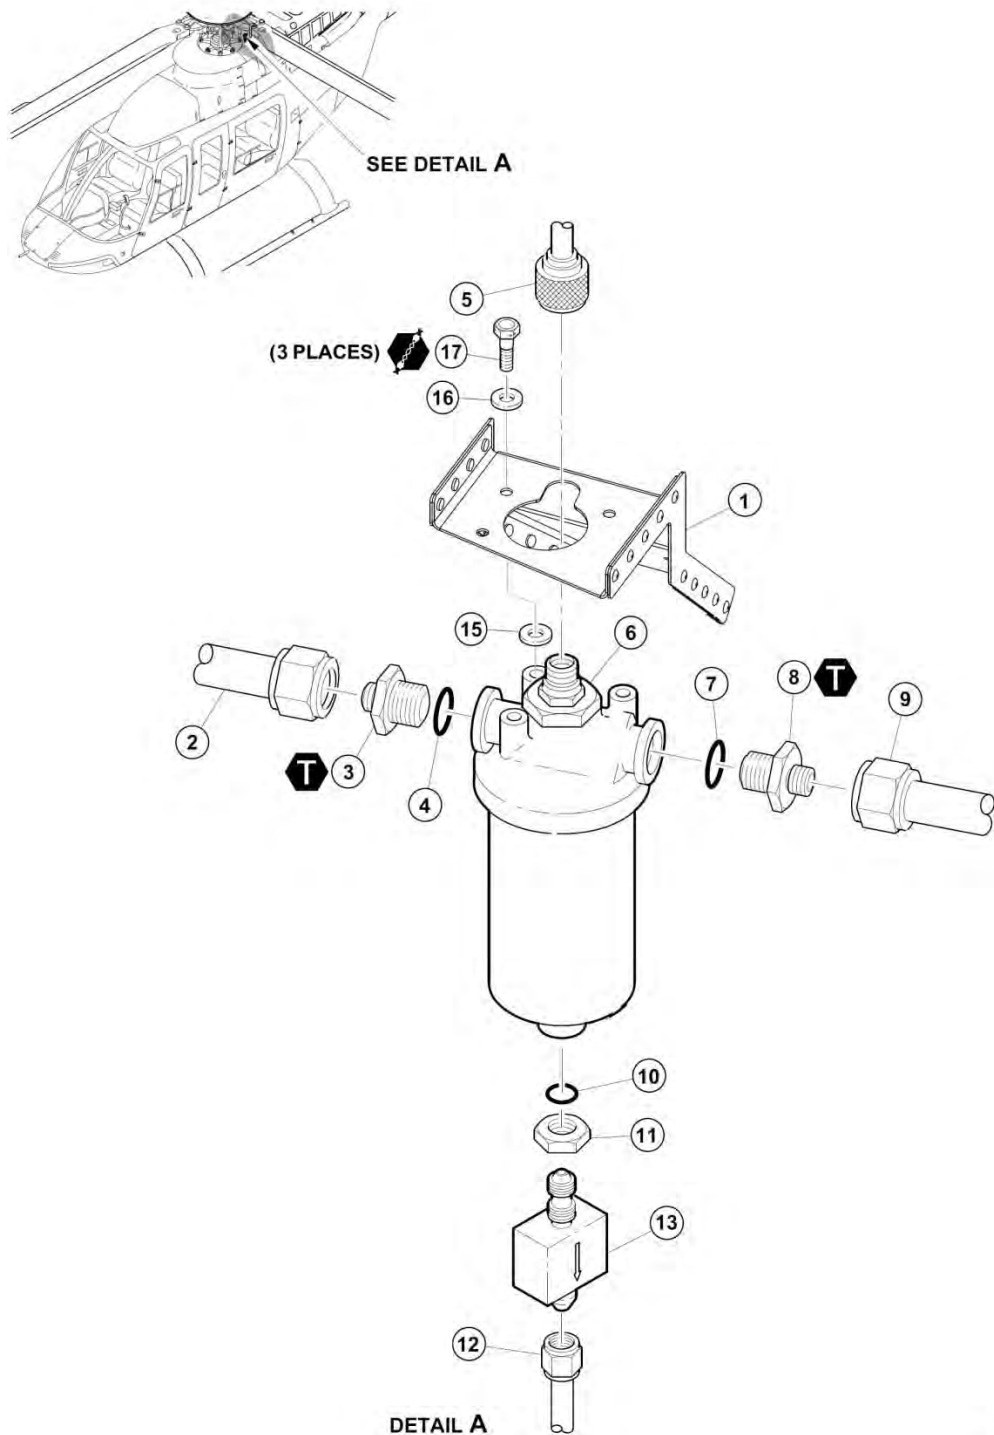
Fuel Filter Assembly (Sheet 1 of 2)
